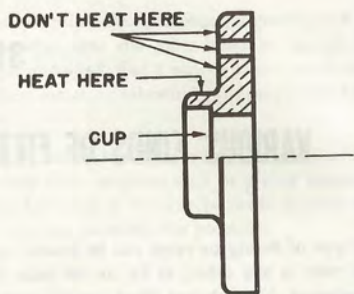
When brazing a flange, heat the base of the cup—not the outer part of the fitting.
